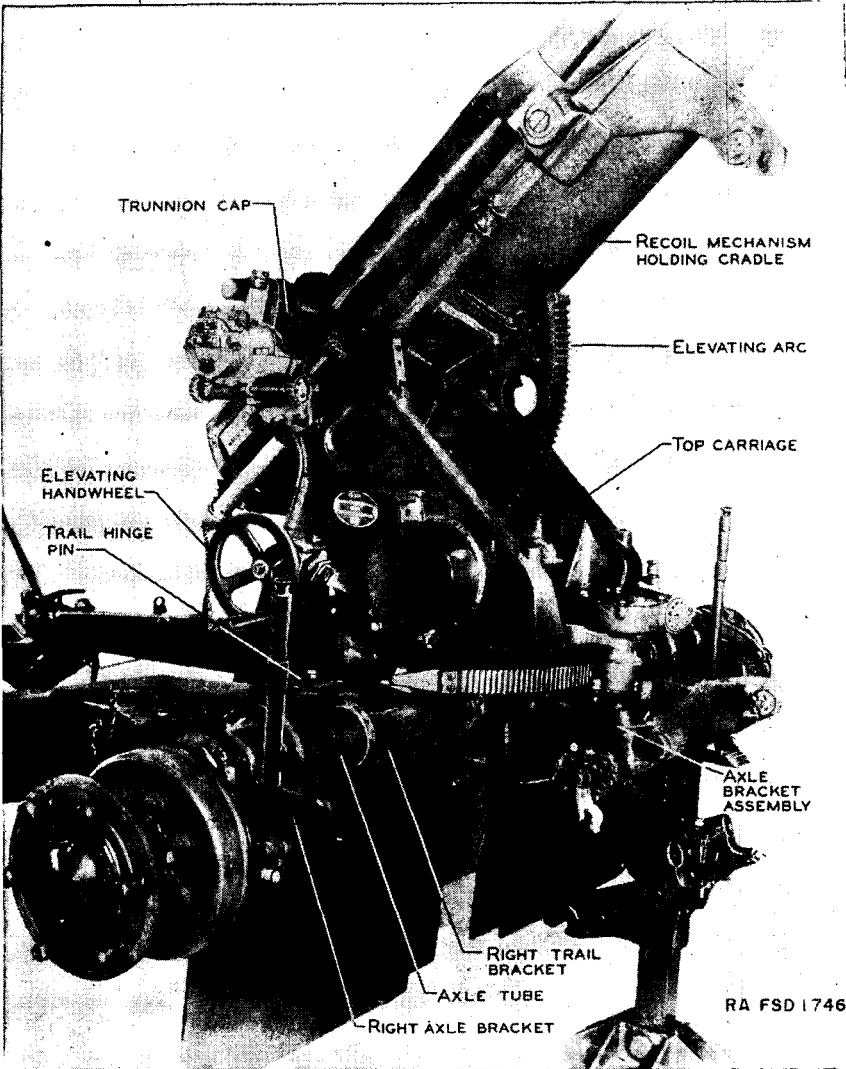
75-mm gun carriage M2A2 with shield and wheels removed, right side view.
